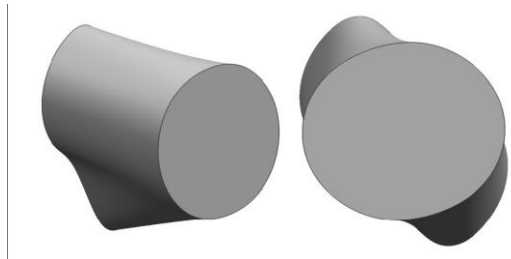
Isometric and front view of a 3-D cammoid model installed in the first prototype.
